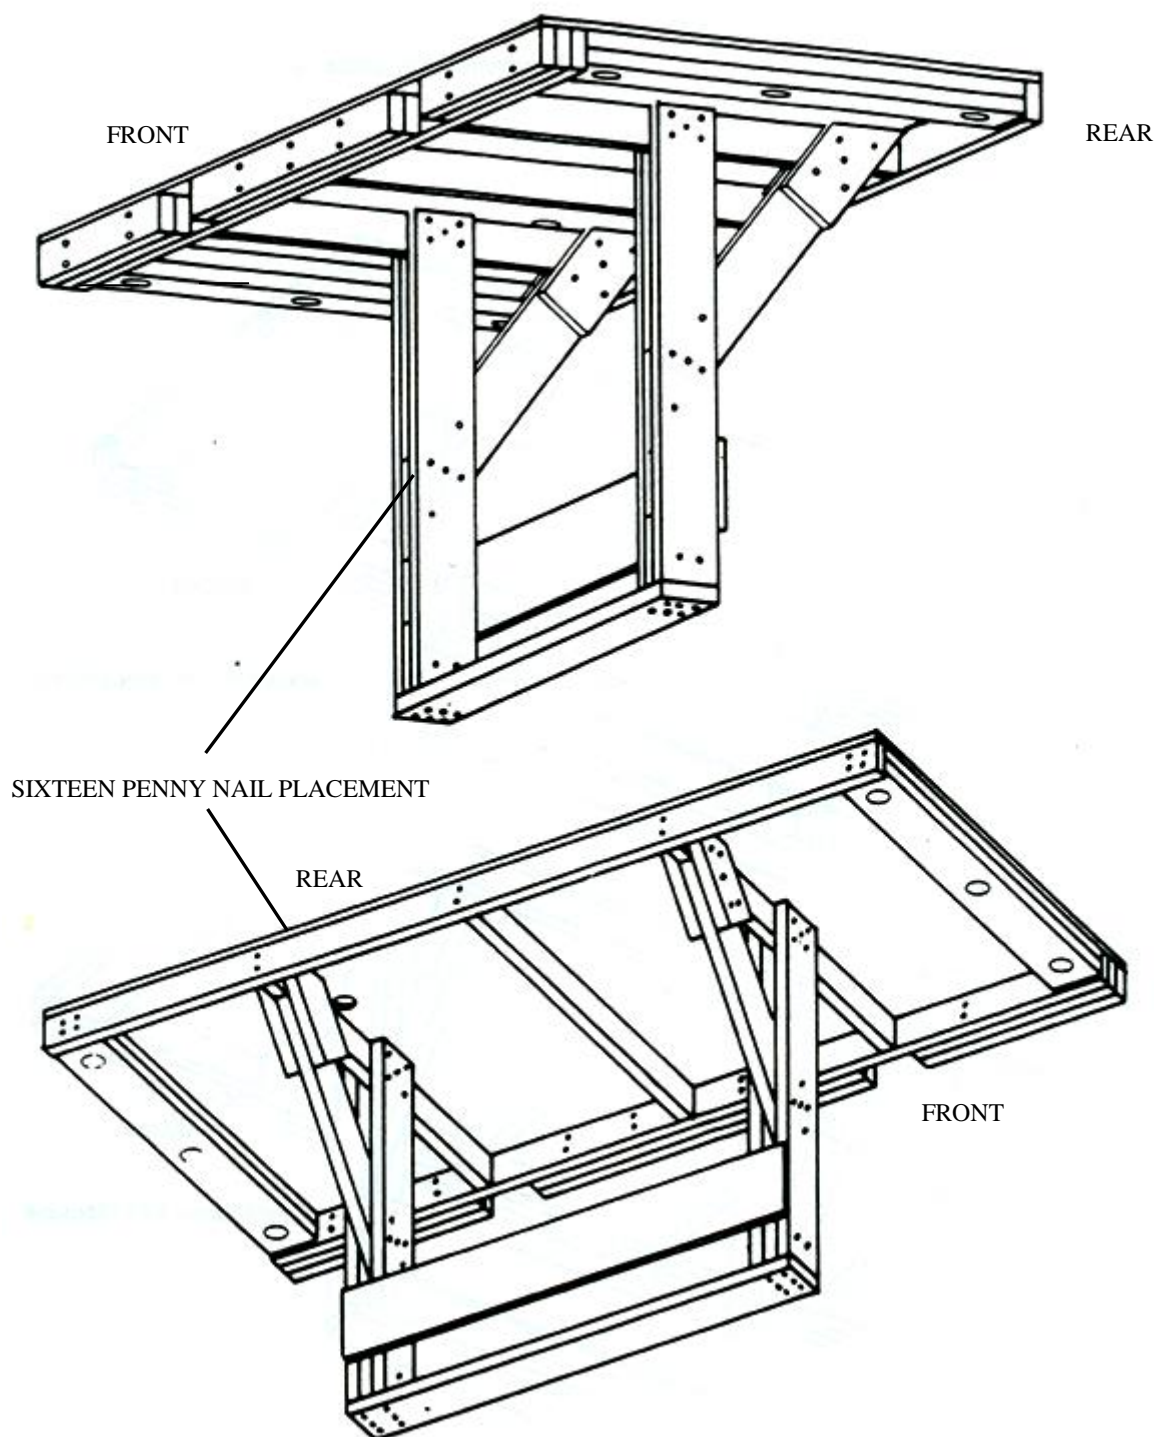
Parachute Stowage Platform Constructed (Continued)
